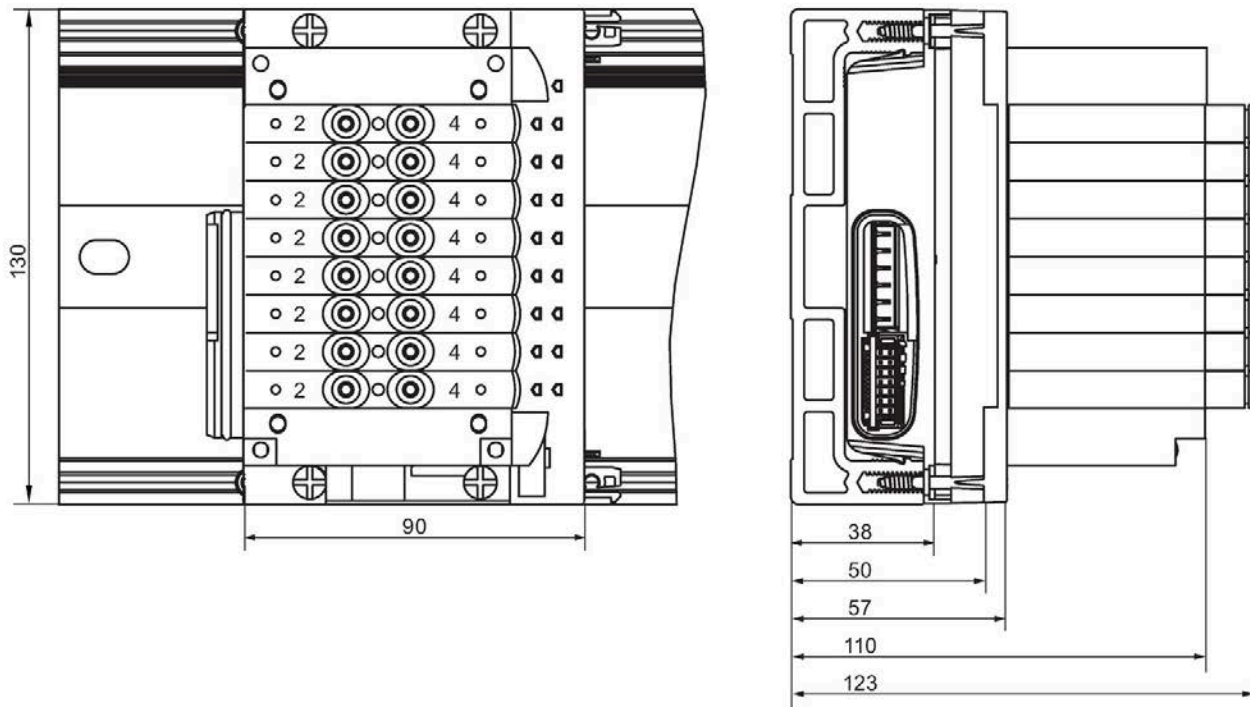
Dimension drawing of 16 DO DC 24V CPV10 pneumatic interface module with FESTO valve terminal CPV10 on compact type rack
